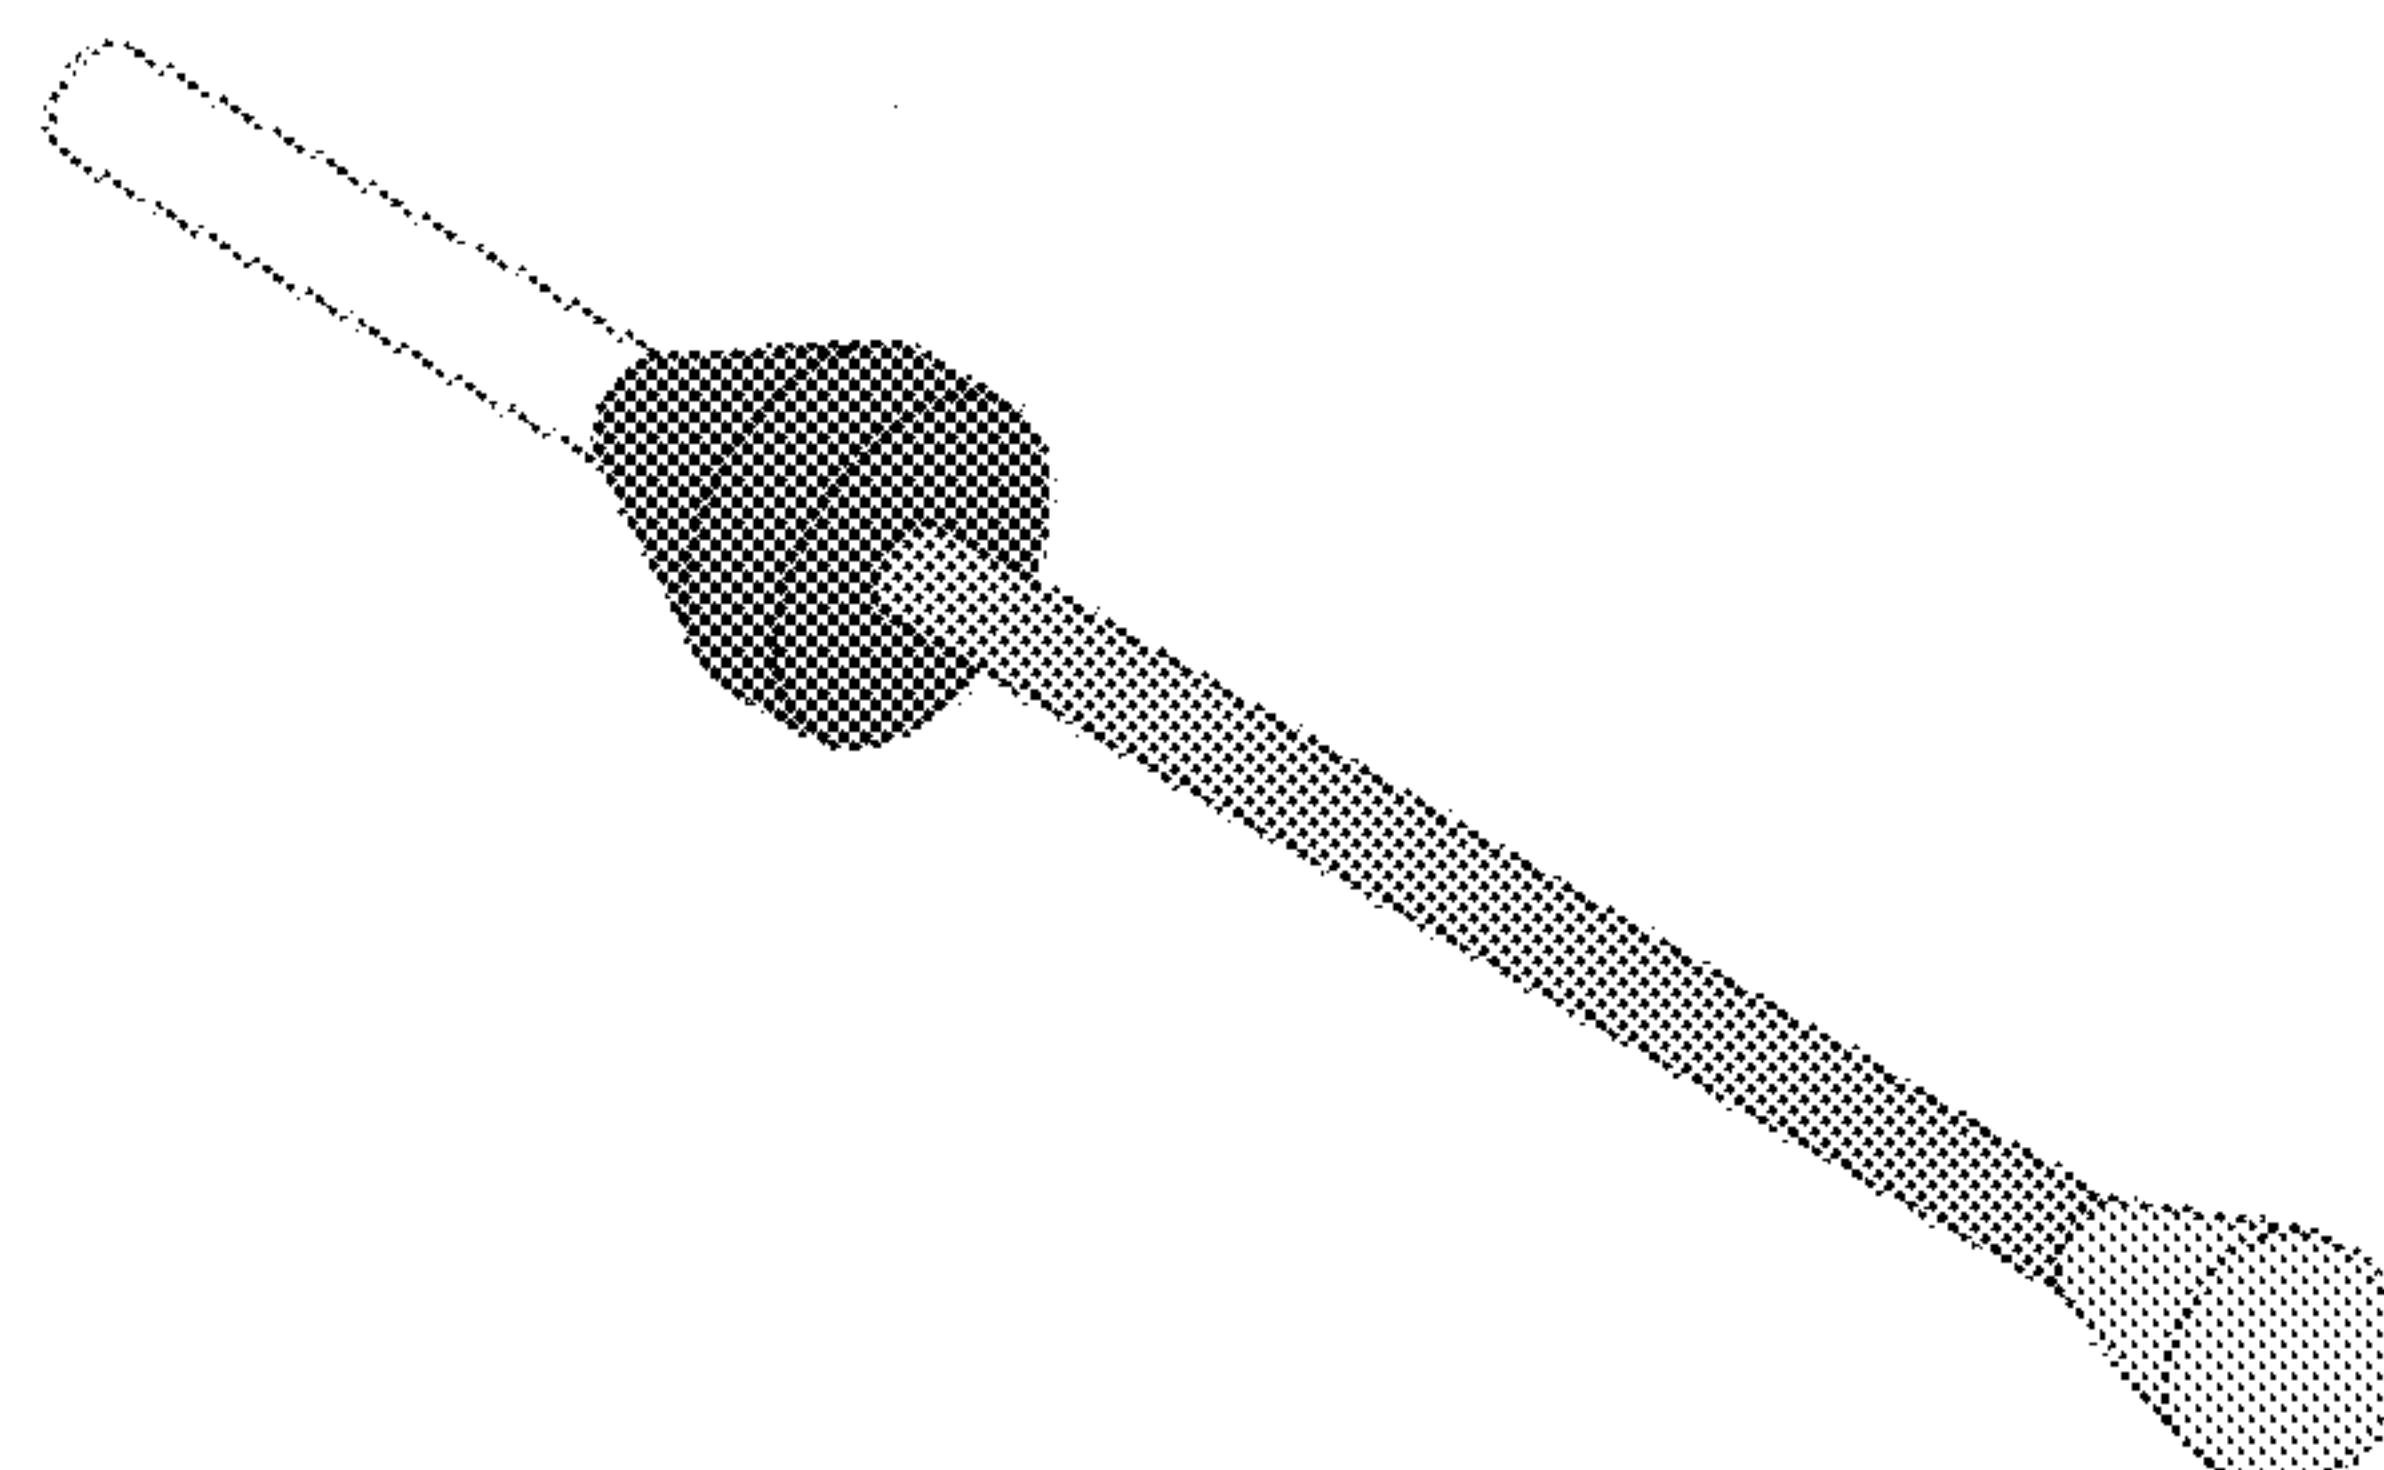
is a front and top isometric view of an alternative embodiment of FIG. 1, the sole difference being the merging of the rod, cone and wick into one piece;
